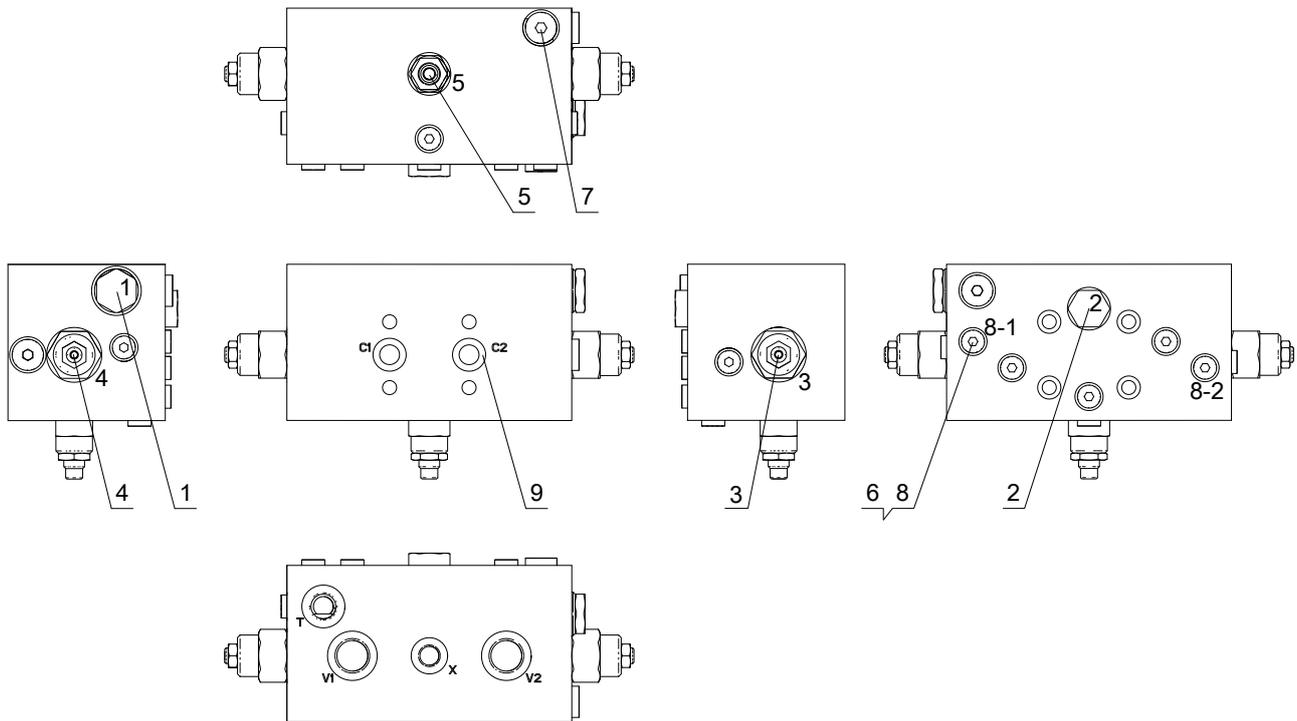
Luffing Counterbalance Valve (PN.202040003269)
